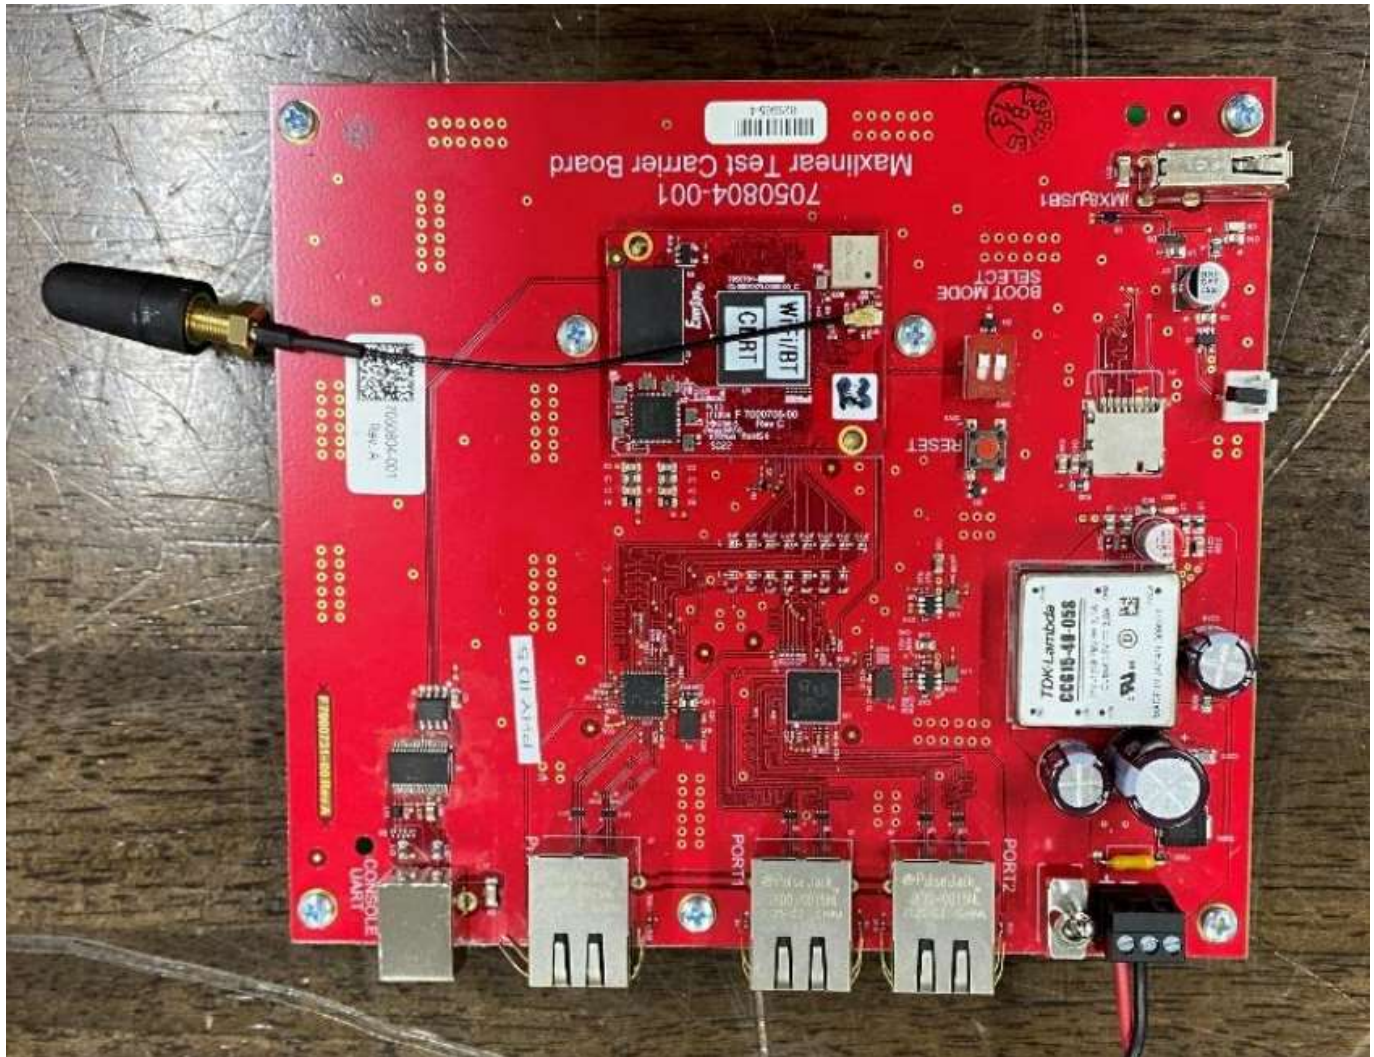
EnerSys #GL0005322 SOM (with WiFi/BT radio integrated) mounted in Carrier PCB.
